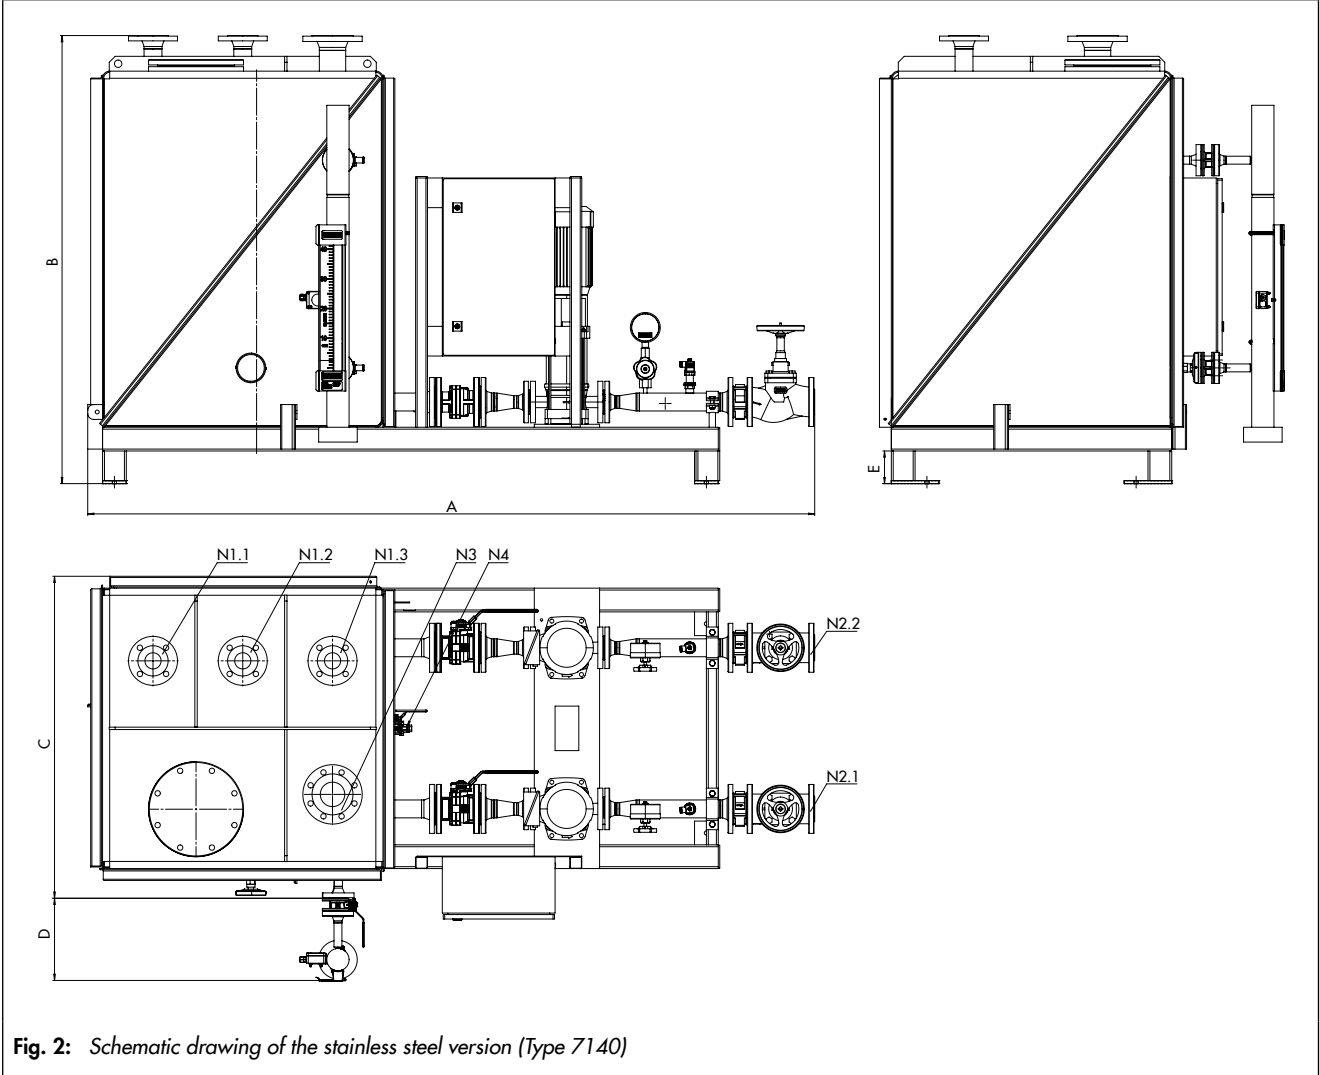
Schematic drawing of the stainless steel version (Type 7140)
